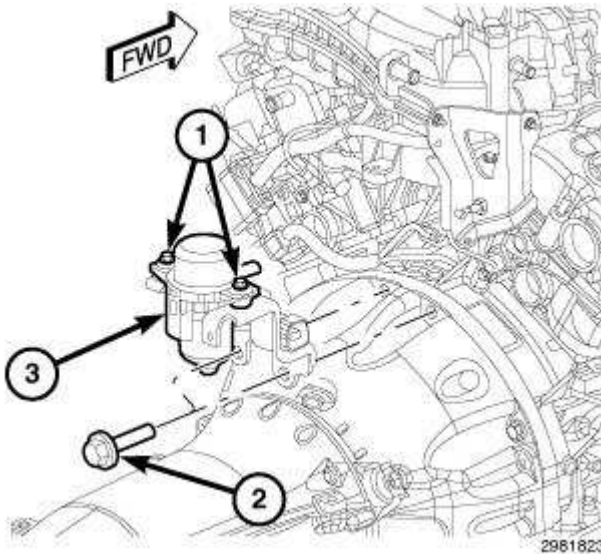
Electric Vacuum Pump, Bolts & Studs
